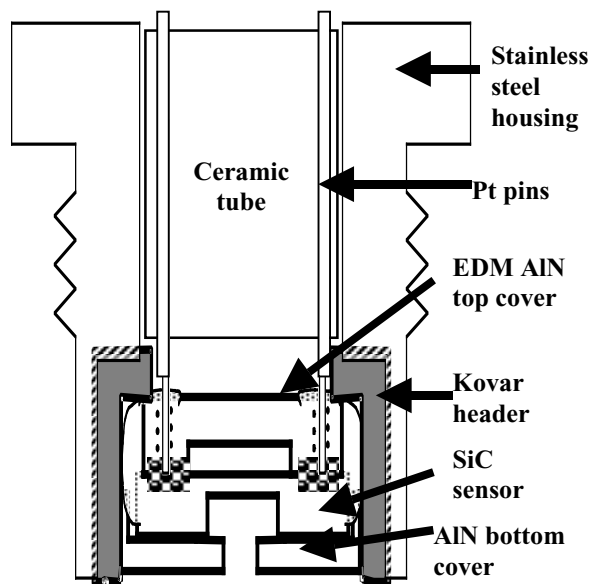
Sub-assembled 6H-SiC sensor unit prepared for insertion into the stainless steel screw housing.
